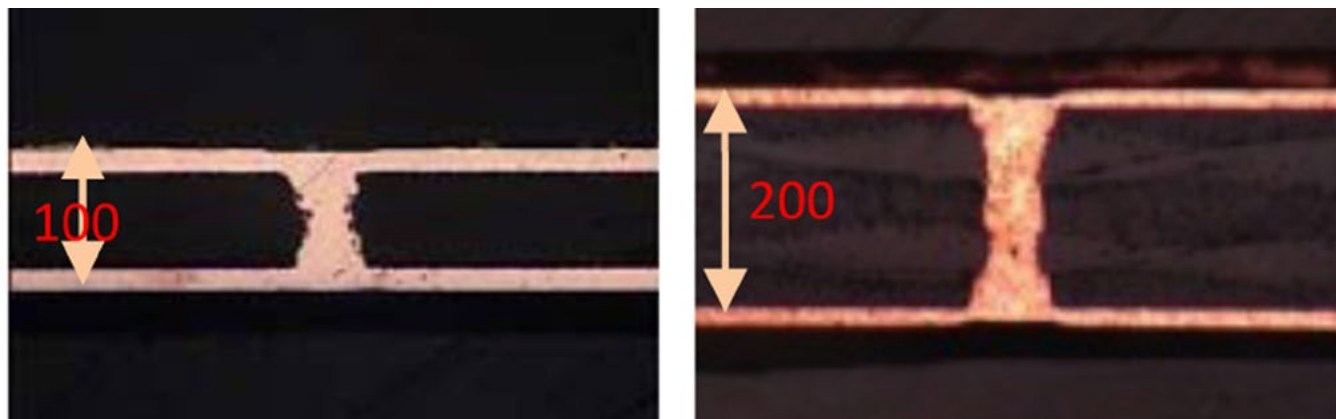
Double-sided laser drilled through-hole in 100 μm (left) and 200 μm (right) thick panels.
